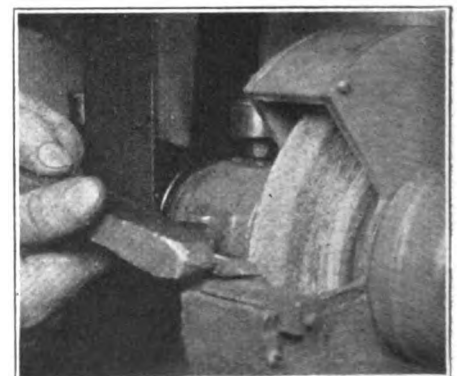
A Different Shaped Tool Is Used for Brass Turning.
